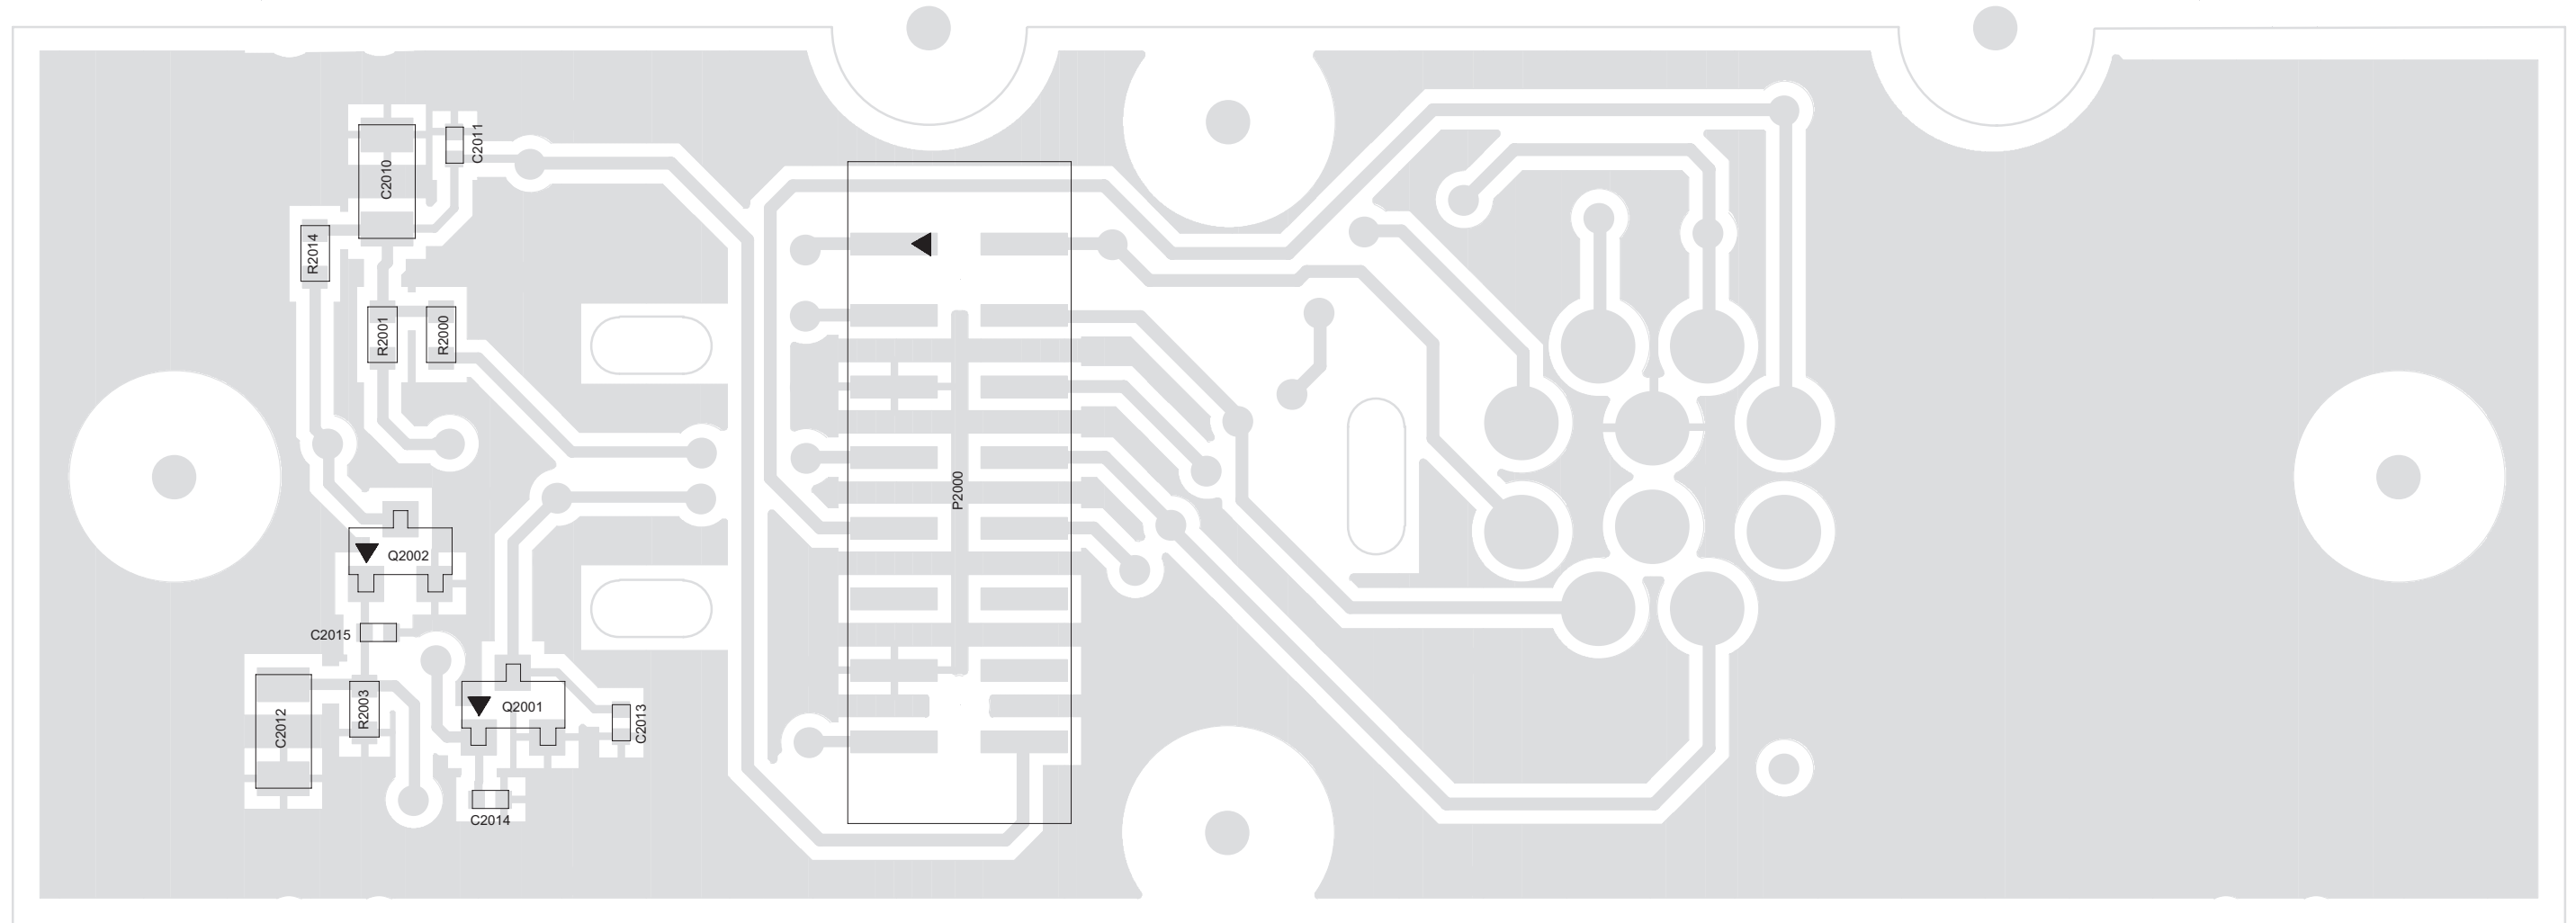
PPLN1694A GCAI Circuit Board Layout - Side 1
